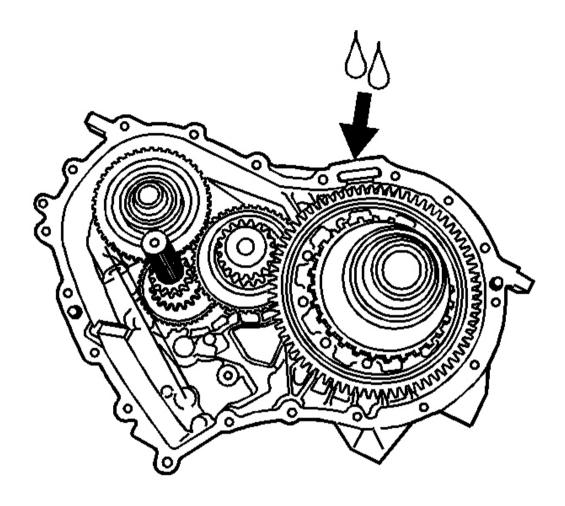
Applying Sealant To Transaxle Case & Clutch Housing Mating Surface Courtesy of GENERAL MOTORS CORP.
